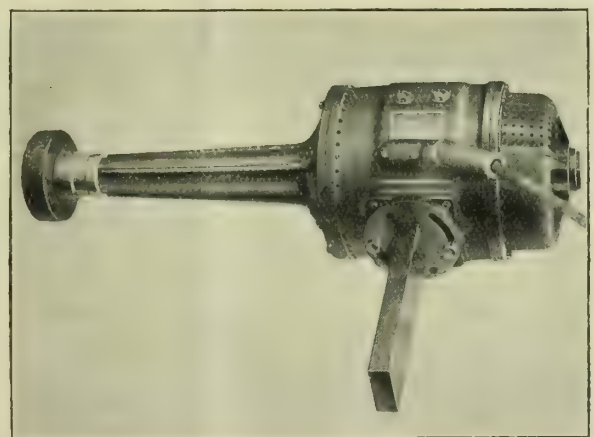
AN ELECTRIC TOOLPOST GRINDER. (The Consolidated Pneumatic Tool Company.)
